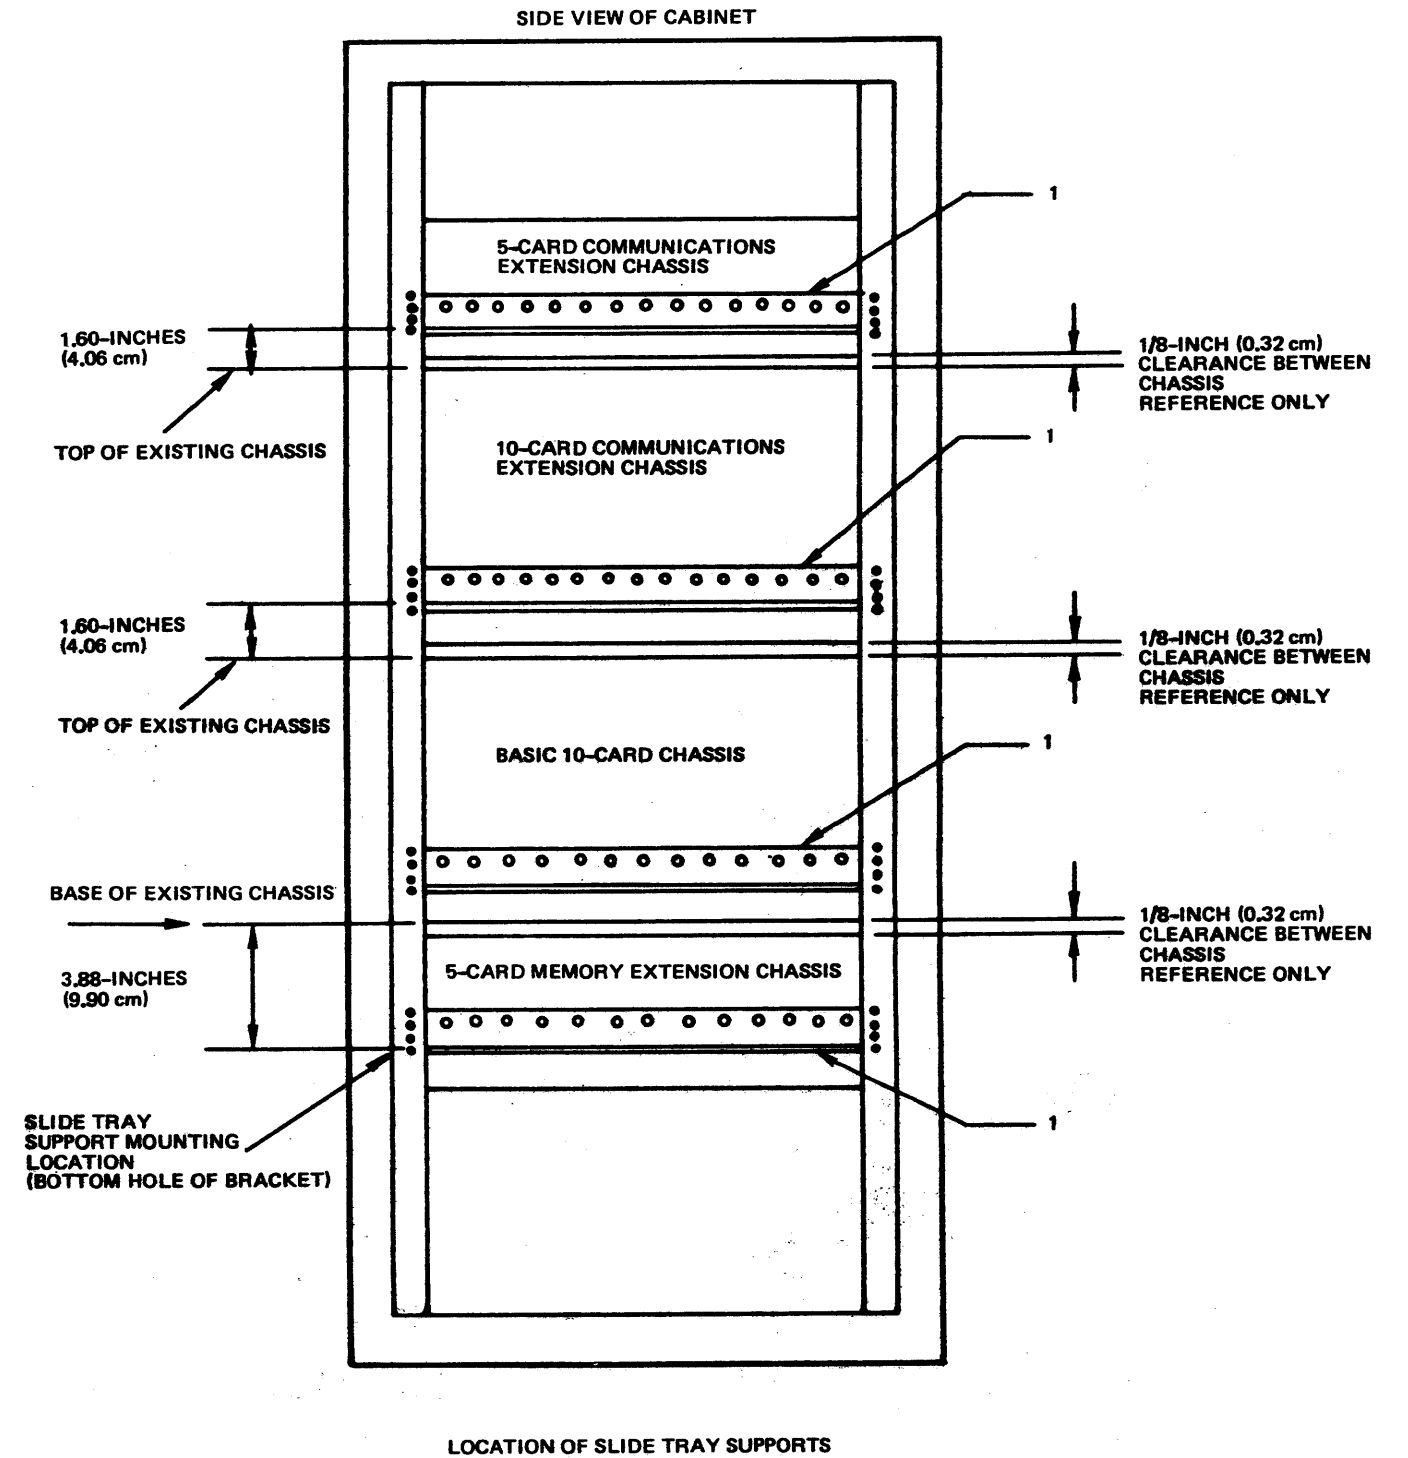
Ten-Card Chassis Installation (Sheet 2 of 2)
